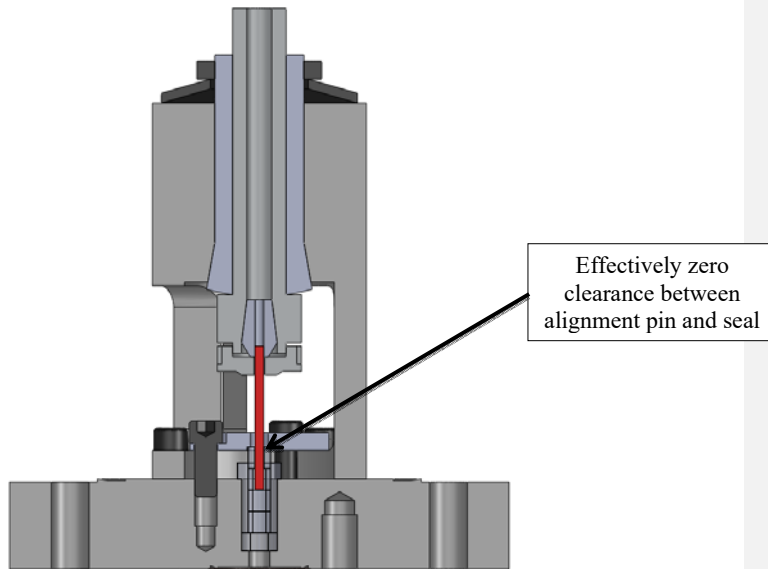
Shaft-Seal Sub-Assembly with 3.175mm gauge pin used to align multiple seals; shown here aligning only one seal
